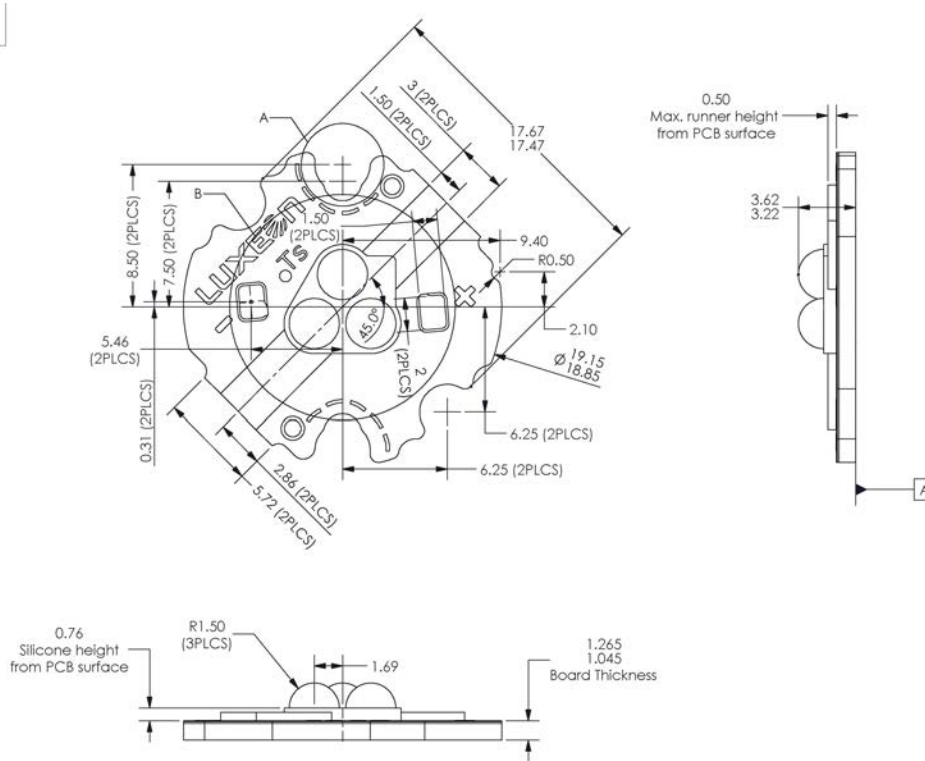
Mechanical Drawings for LXKx-PWxx-0403
